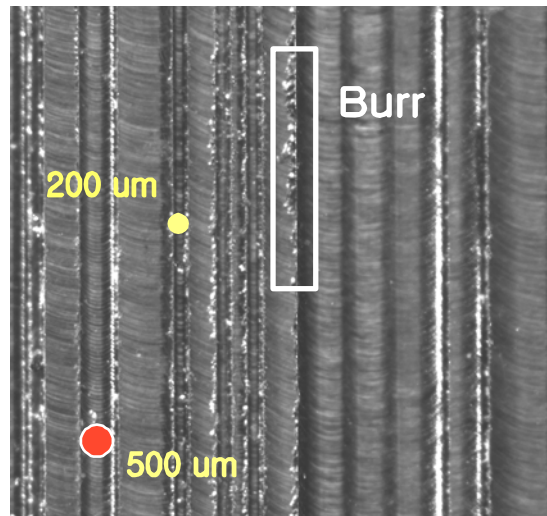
Micro-machined Workpiece (Al-7075) with various size of Micro End-mills (Top View)
